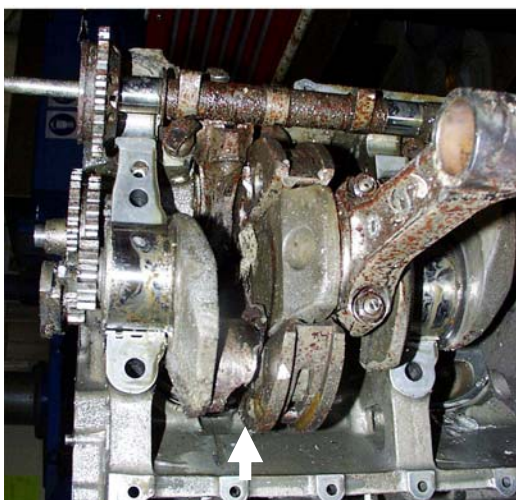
No.6 connecting rod, big end housing bolt. Bolt guide section wear
